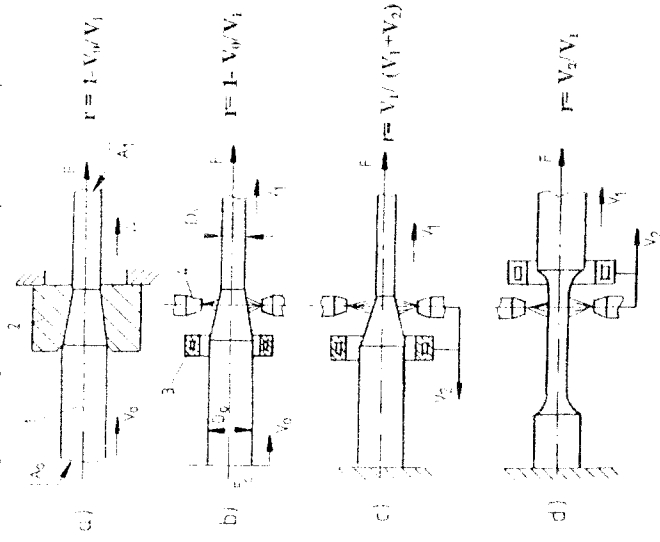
shows the principle of dieless drawing(a. traditional process, b.c.d.dieless drawing); to cause necking the wire is locally heated and to stop further deformation the necked part is cooled. In order to obtain a continuous deformation it is necessary to assure a relative stable movement between the deformation zone of semiproduct and the heating-cooling device.
